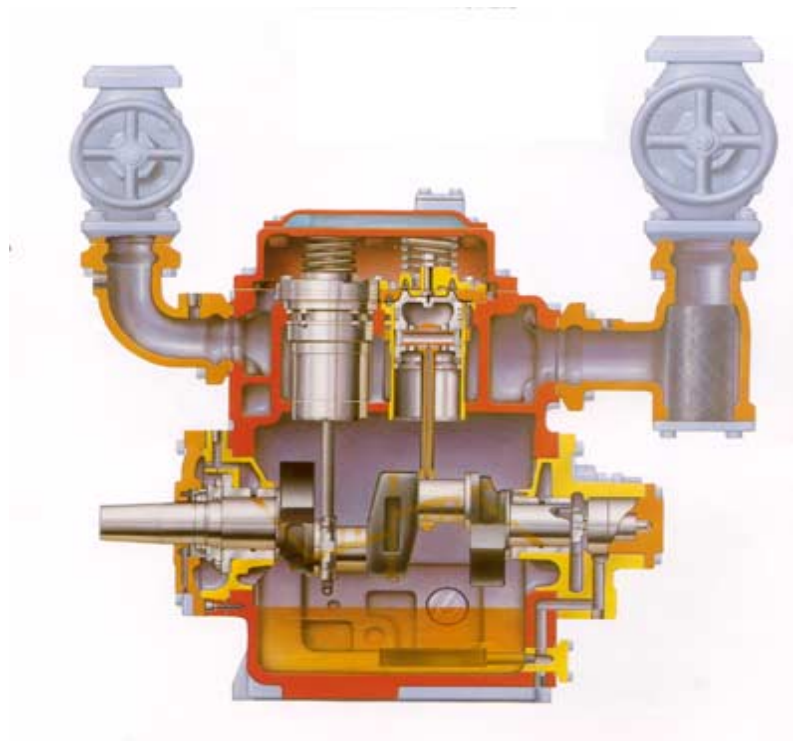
Cut-away of a two-cylinder reciprocating compressor (courtesy of Mayegawa Manufacturing Co. Ltd., 2008)
